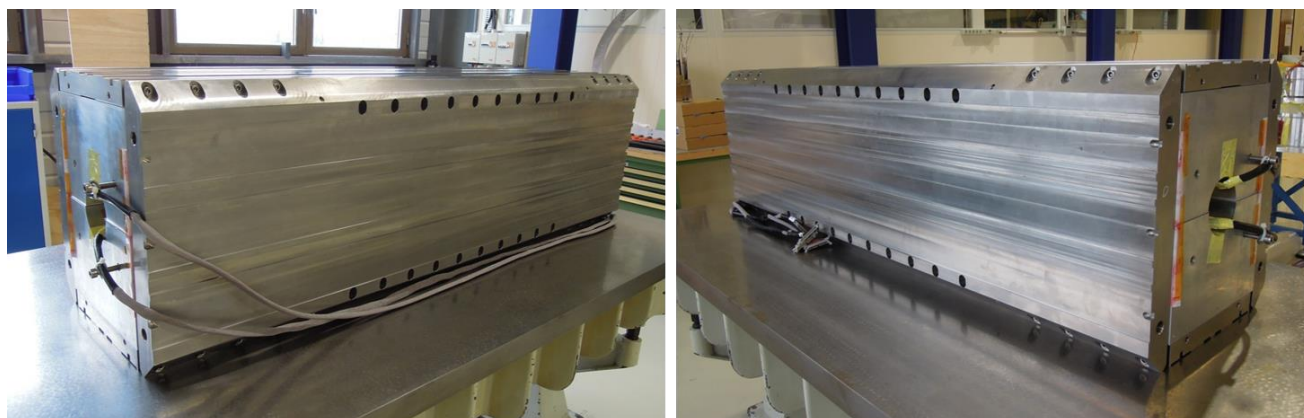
Coil-pack assembled with dummy-coils.
